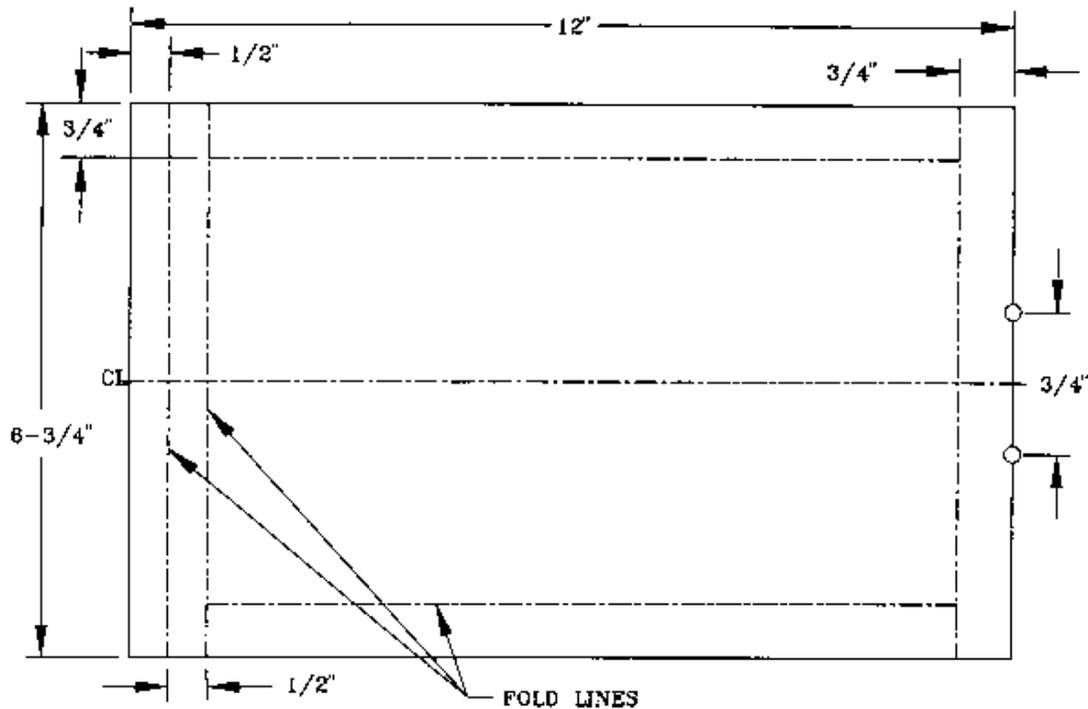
(JUMP PACK, PARACHUTIST) POCKET ASSEMBLY, LOWERING LINE
